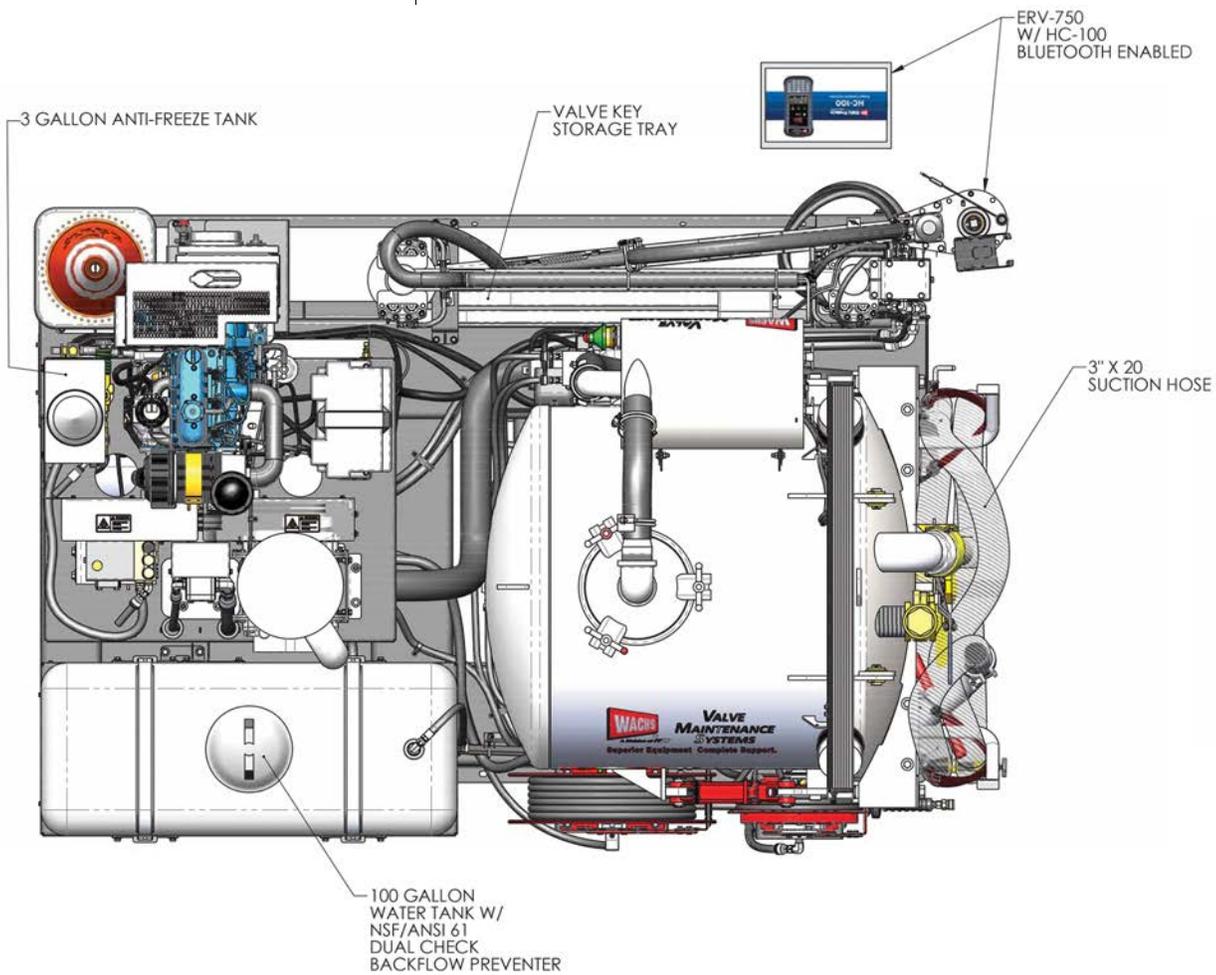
The drawing shows the top view of the Standard LX diesel engine configuration, 77-000-54.
